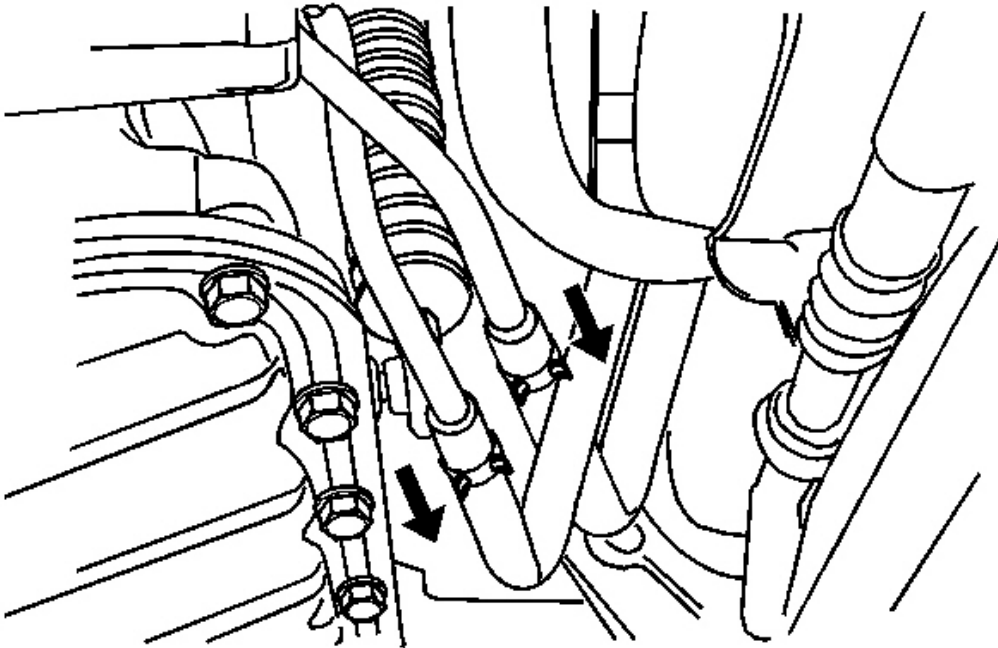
Fluid Cooler Inlet/Outlet Hoses & Transaxle
